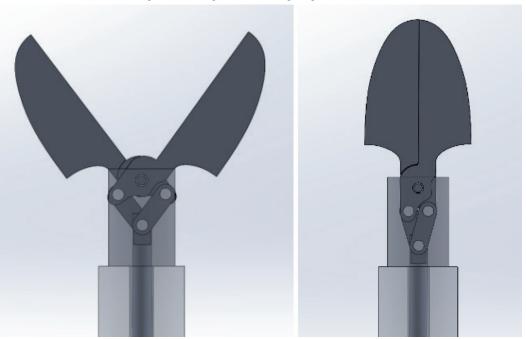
S olidworks images of the rotating hinge mechanism in the open and closed state
